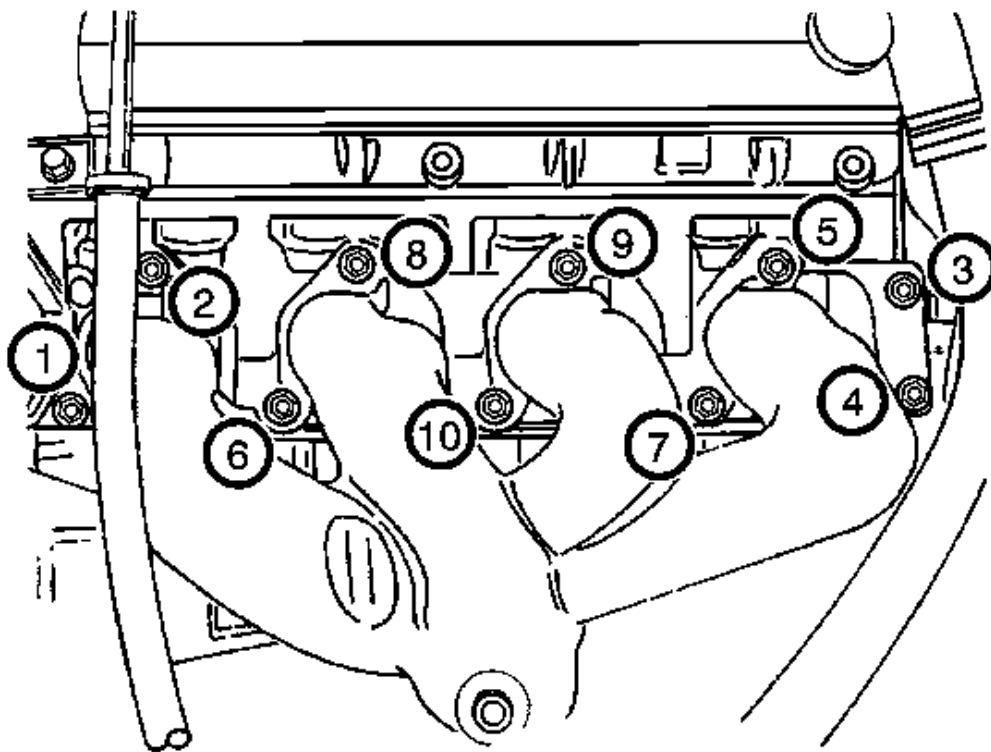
View Of Exhaust Manifold Retaining Nut Removal Sequence
